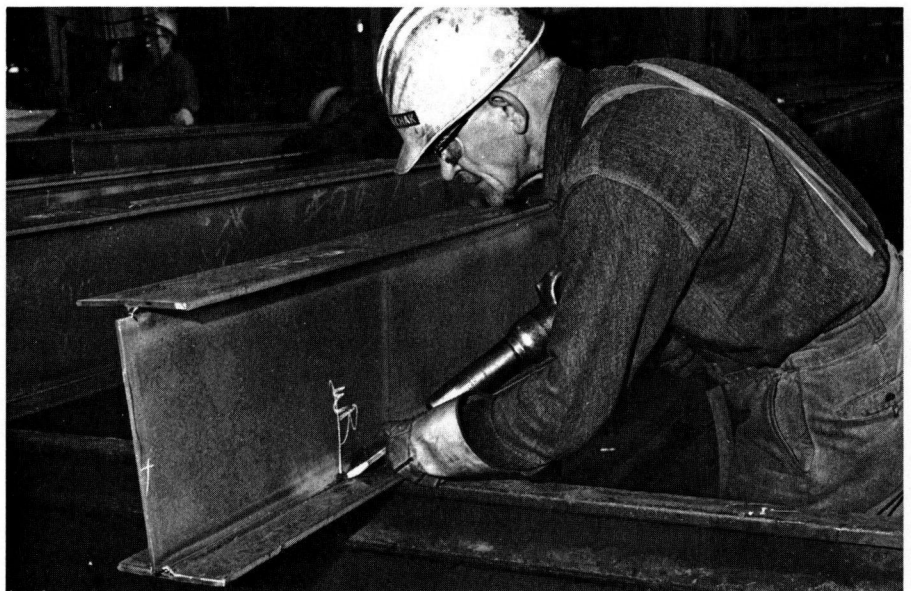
Repairing the web-to-flange fillet weld.
